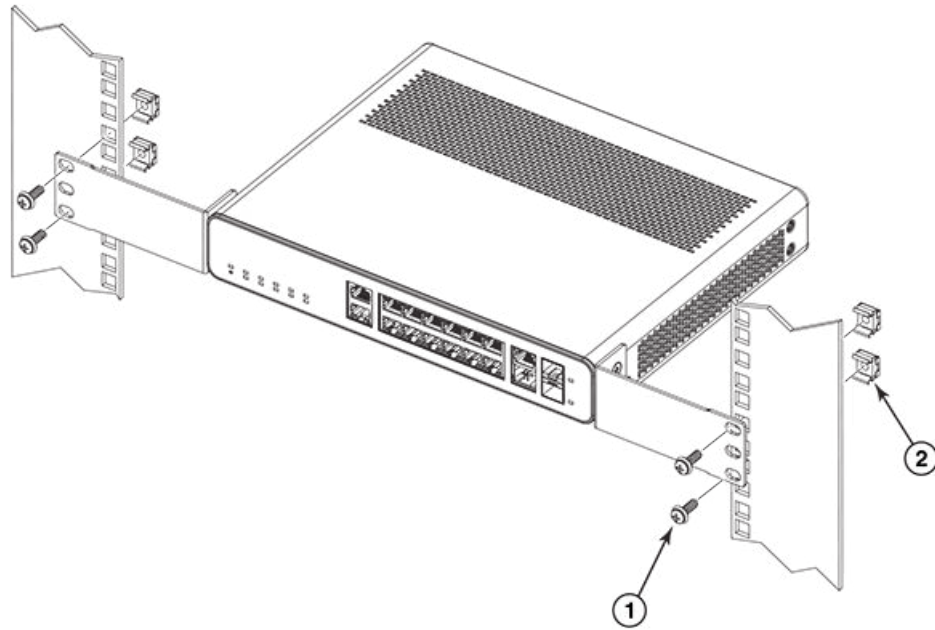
Attaching the mounting brackets for an ICX 6450-C device
